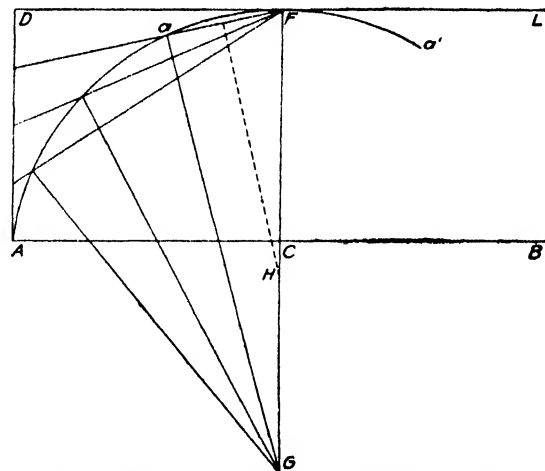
Method of Obtaining Radius for Outer Side of Blank
